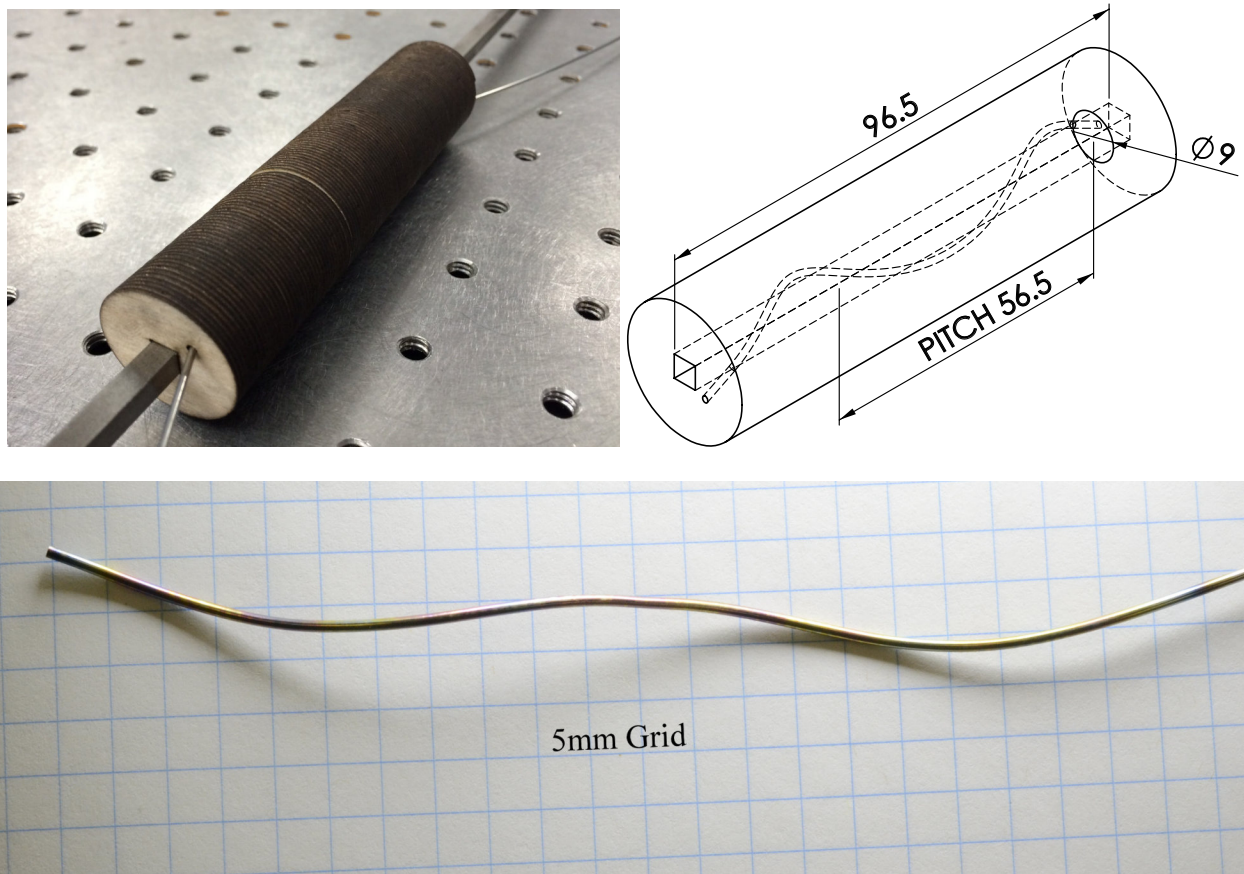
(Top Left) This jig for a helical tube was formed by slicing the fixture into discrete cross sections. Each cross section is made of a 0.85 mm thick sheet of birch plywood. (Top Right) Dimensions of the helix that the tube was constrained to. (Bottom) The tube is shown after shape setting.
